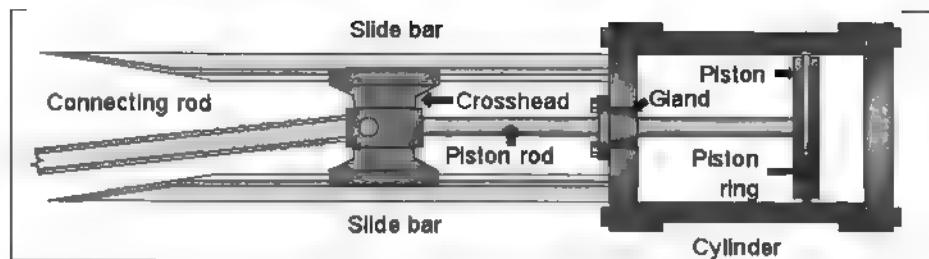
The crosshead guides the piston rod in and out of the cylinder moving between the slide bars. It is fixed to the small end of the connecting rod.
